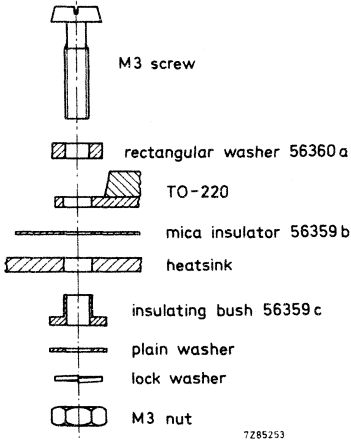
Insulated screw mounting with rectangular washer. Known as a "bottom mounting".
